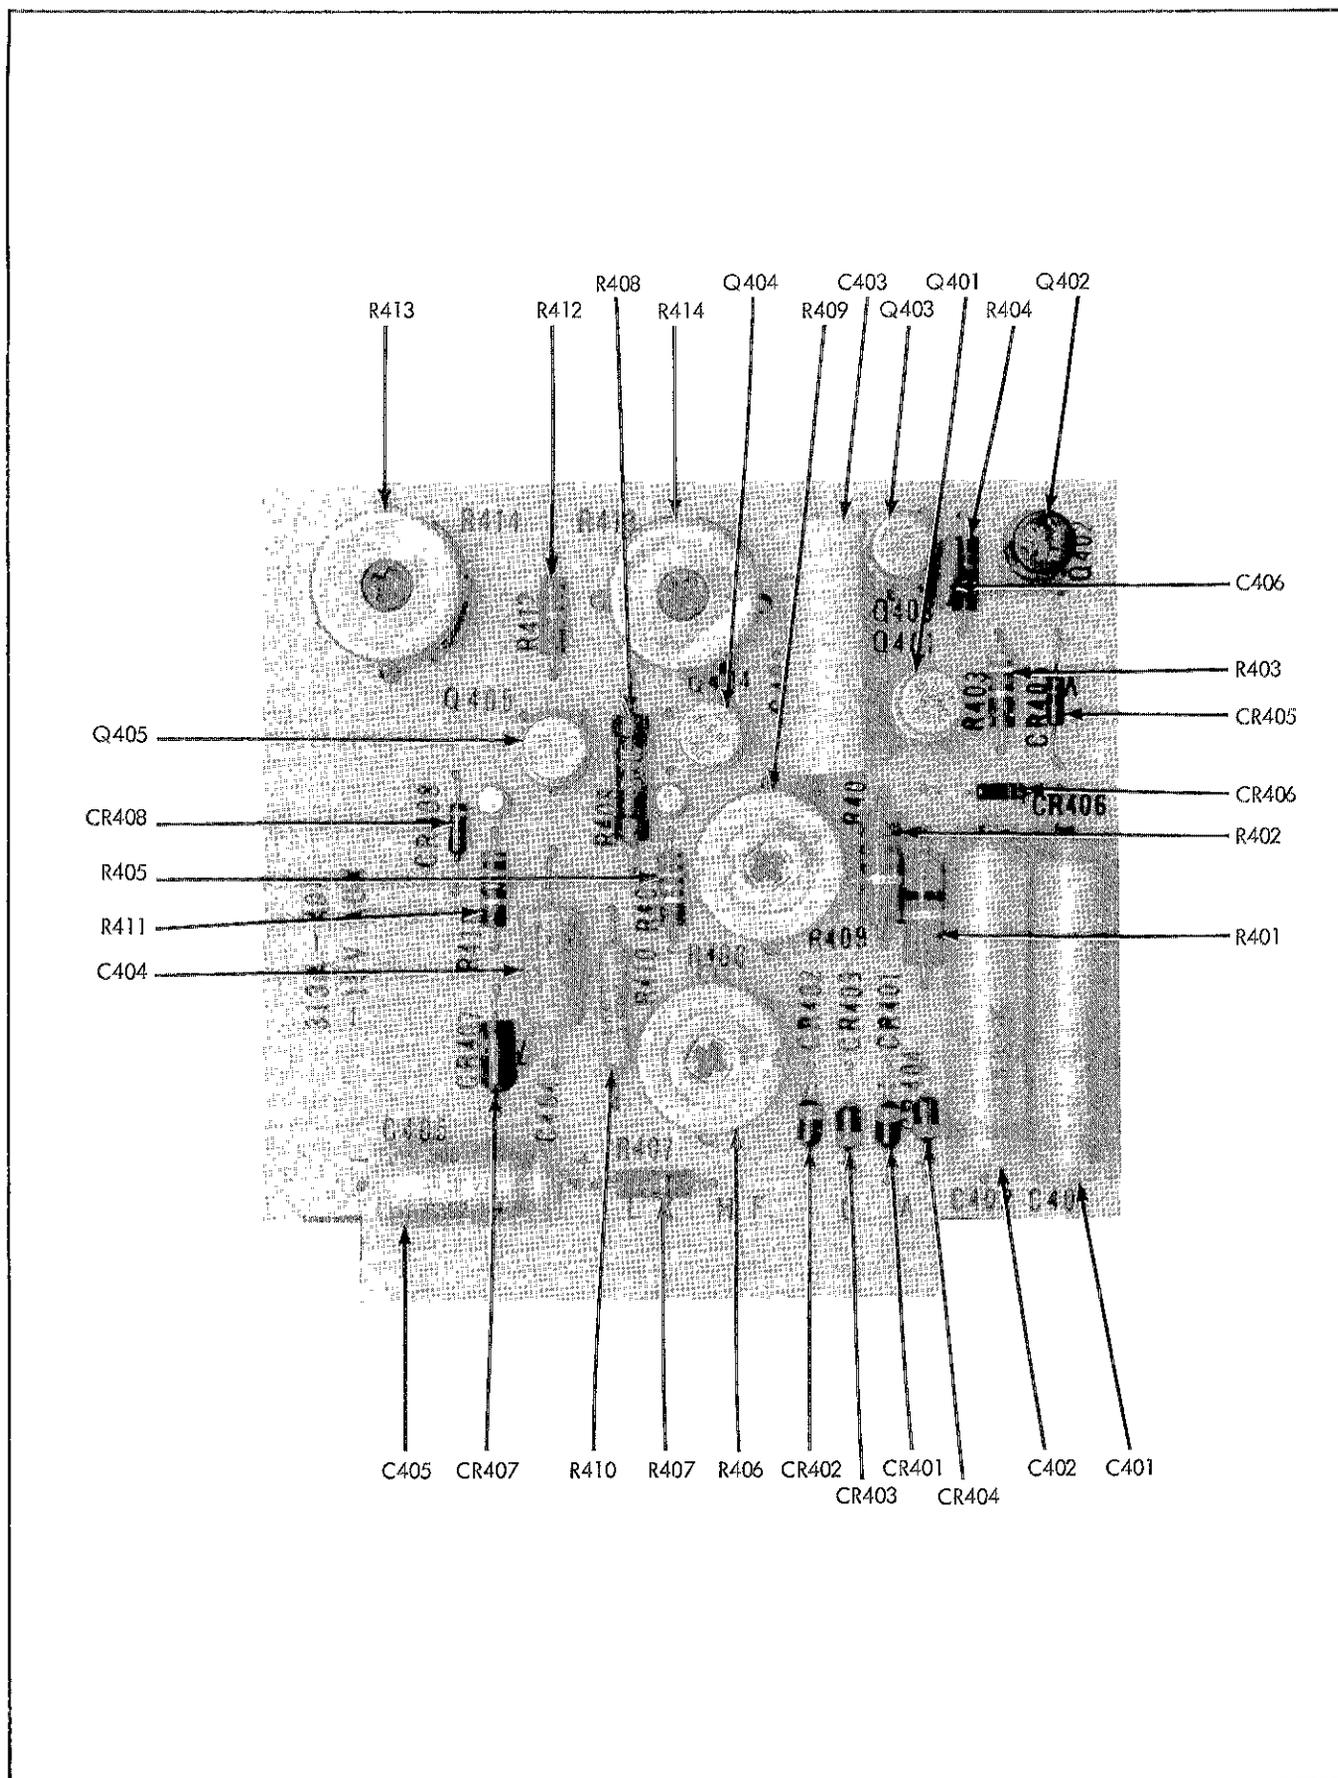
AUXILIARY POWER SUPPLY ASSEMBLY, -15V.
